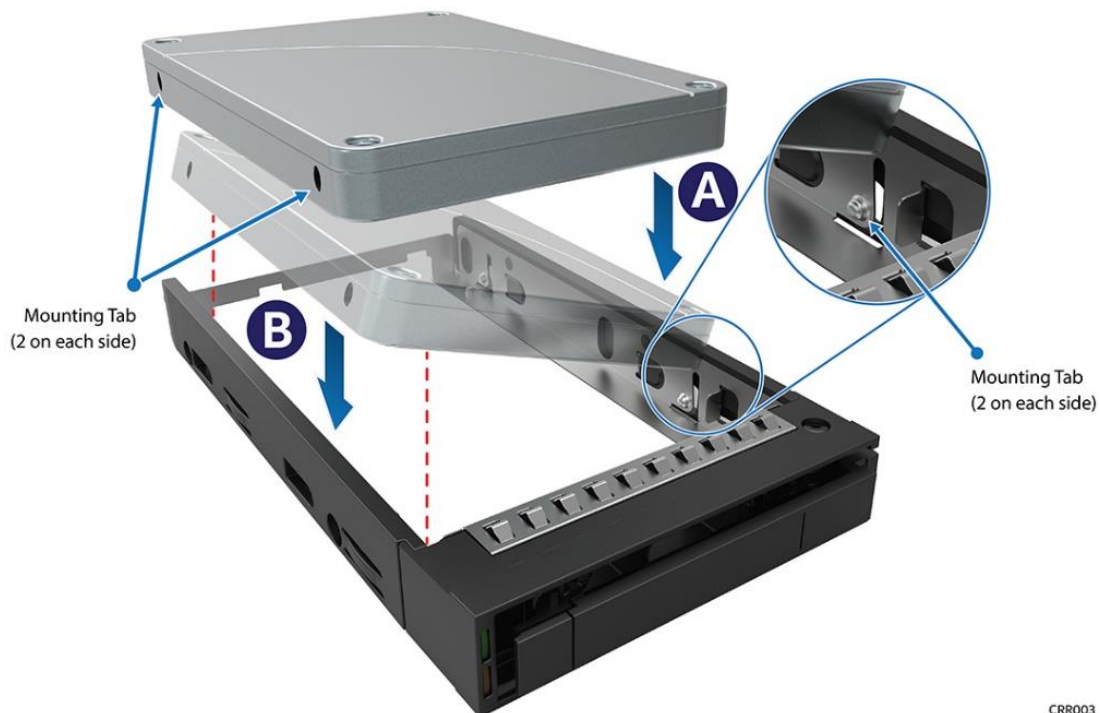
2.5" Drive Carrier Assembly – Drive Installation into the Carrier
